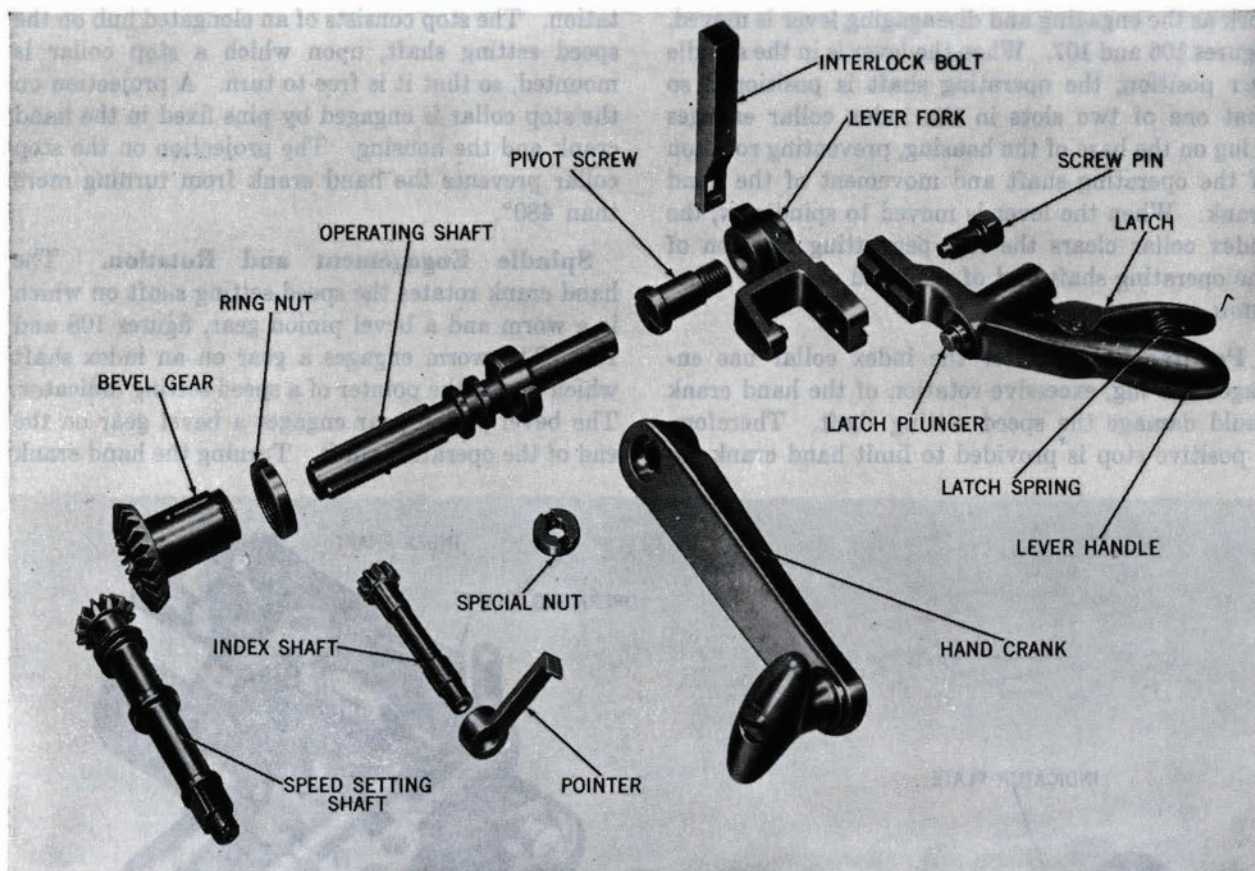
Simple Type Speed Setting Mechanism—Control Section Partially Disassembled.
